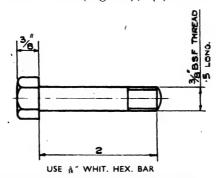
DIMENSIONING-A BOLT AS DRAWN FOR A TOOLMAKER
